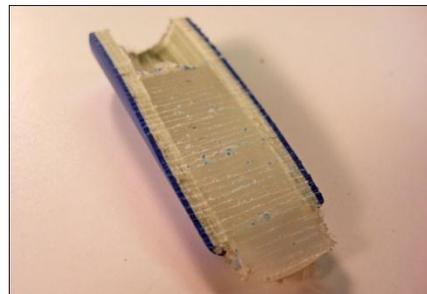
Spin Welding of End Plug into Thermoplastic Pultrusion Tool Handle
